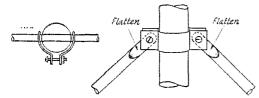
Method of mounting elements shown at the left requires drilling the boom, but provides inexpensive and secure assembly. Clips are cut from sheet aluminum and bent to fit. The mounting of the suspension bracing arms to the vertical support is shown at the right. Braces are flattened at the ends and bolted to brackets that clamp to the supporting pipe.
